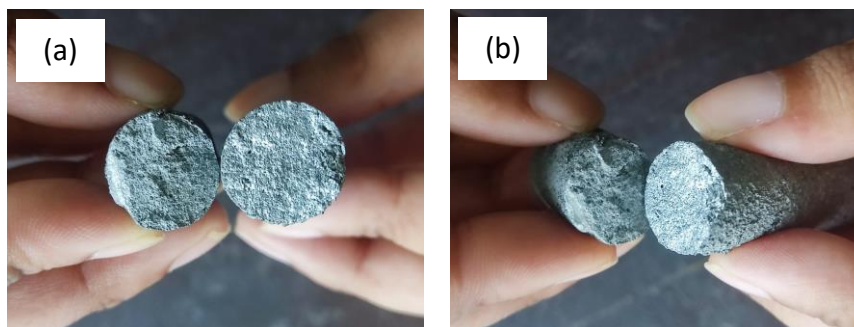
Fracture surface after tensile test for (a) Alloy 1 (Al-12wt.%Sn-8wt.%Cu) and (b) Alloy 2 (Al-20wt.%Sn-10wt.%Cu)
